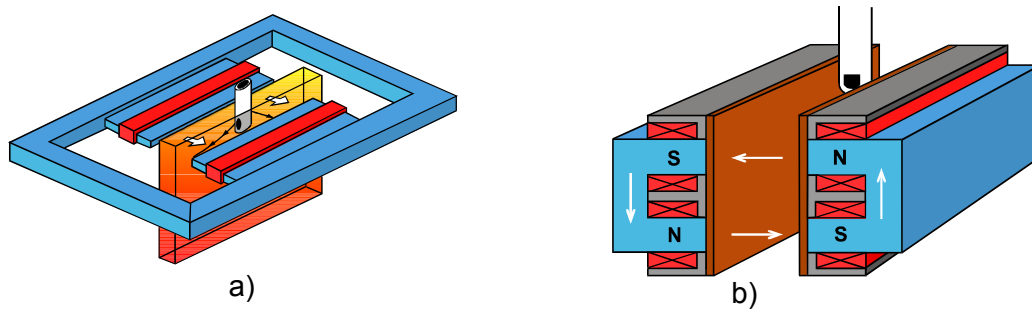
Schematic diagram of DC electromagnetic devices in slab casting mold. a) EMBR; b) FC Mold
